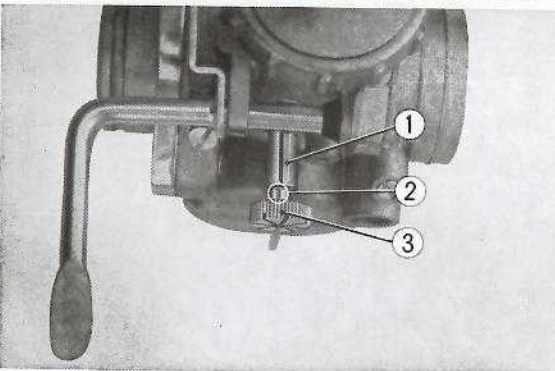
① Index mark ③ Throttle stop screw
